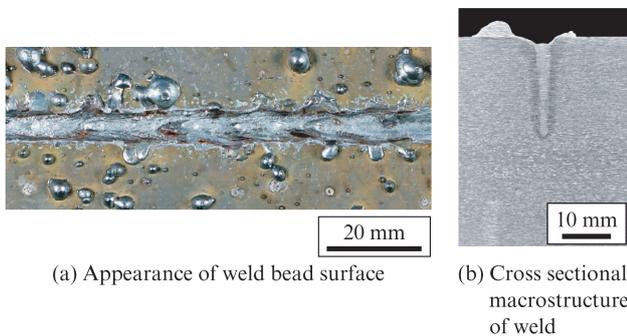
Example of high-power fiber laser welding (Laser power: 25 kW, Welding speed: 1 m/min, Melt run)
